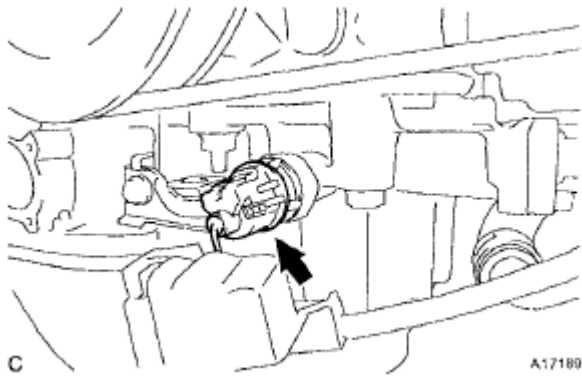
Locating Oil Pressure Switch Assembly Connector
